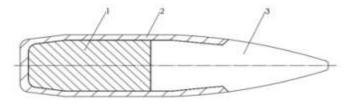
Projectile 6.8 mm SP (Steel Penetrator)
